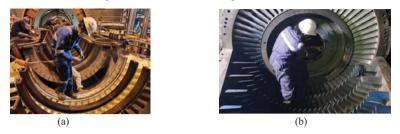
casing alignment data collection process (a) Top off with piano wire (b) Top On with laser alignment tool.
